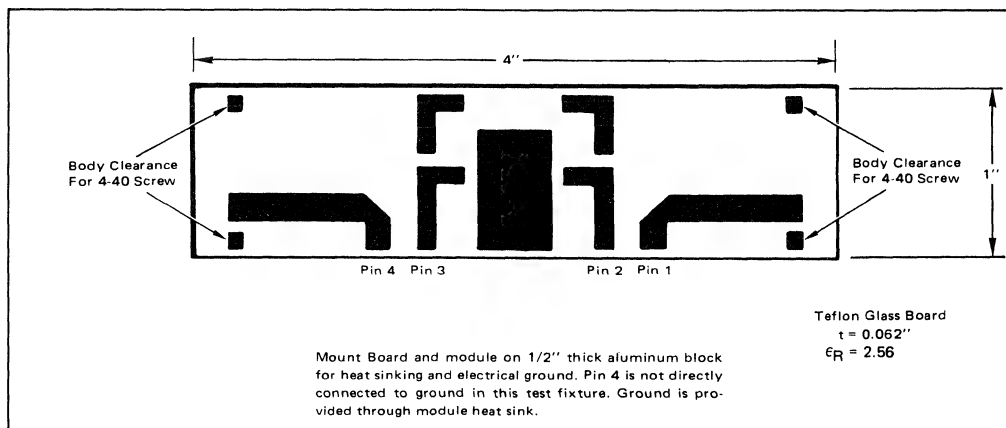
VHF POWER MODULE TEST FIXTURE
